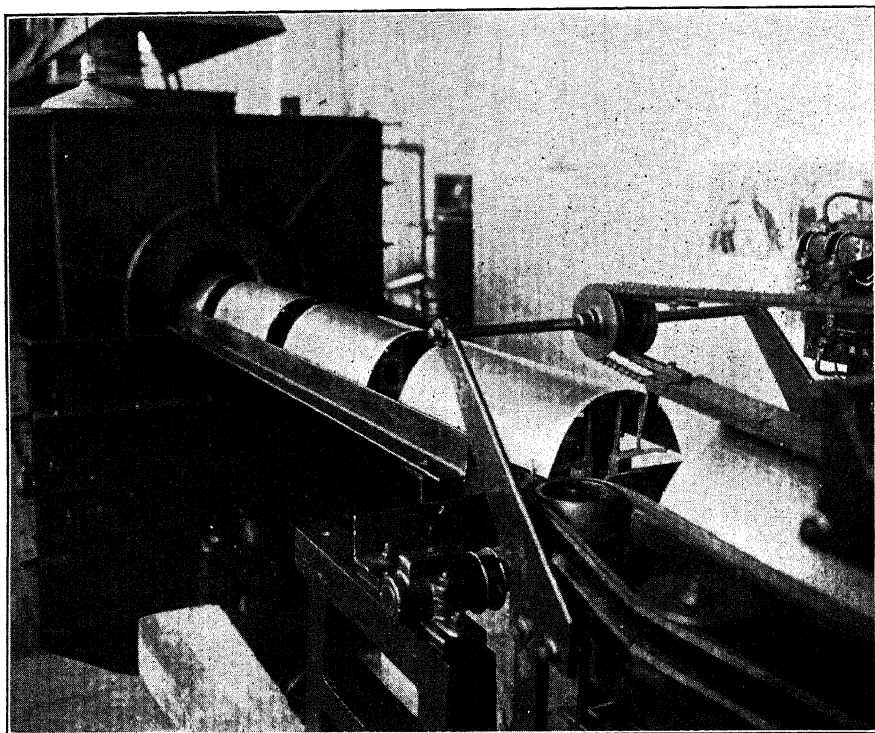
SHEET-ARCHING MACHINE AND FURNACE CONVEYOR, SHOWING BOWED SHEETS ON THEIR SUPPORTS ENTERING THE FURNACE.
